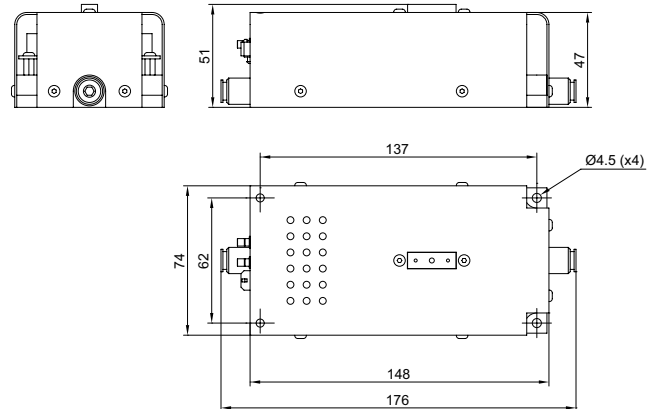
Outline drawing of encased version DPB2 series Pockels cell drivers
